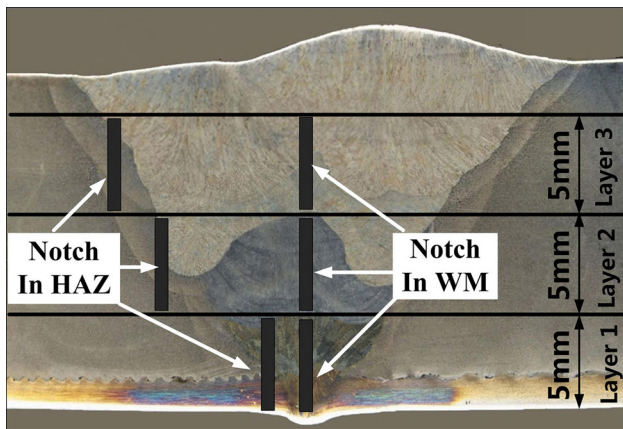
Stratified scheme for stratified Charpy V-notch impact test for welded joint
